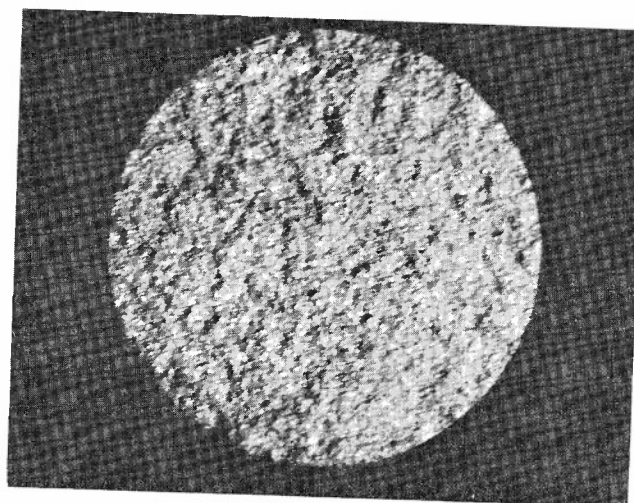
Flick Inspection Results and 10X Black and White Photographs of Fracture Faces of Disparate Specimen A30W from ATJ-S Billet L-1-8
